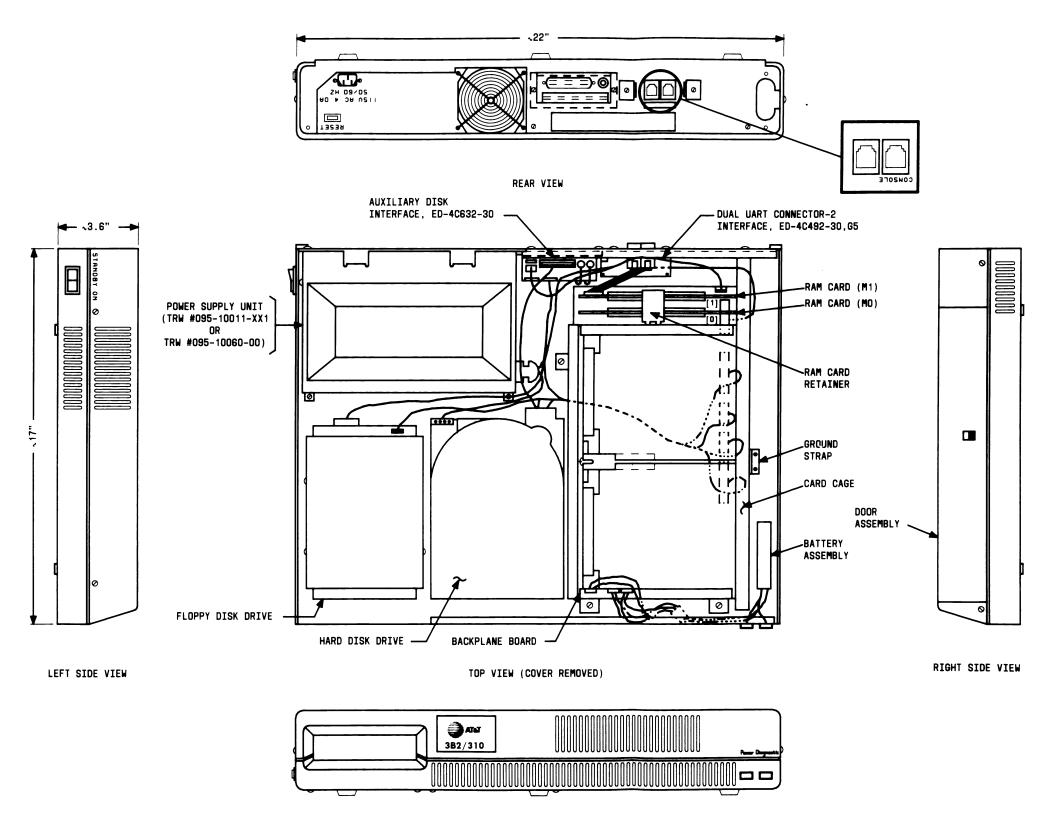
Domestic 3B2/310 Computer Cabinet Assembly Drawing (ED-4C645-30)
